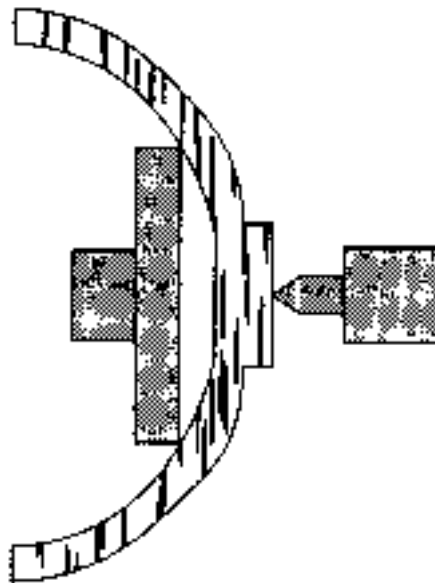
Mount project between your Tailstock mounted Center and a Faceplate.
